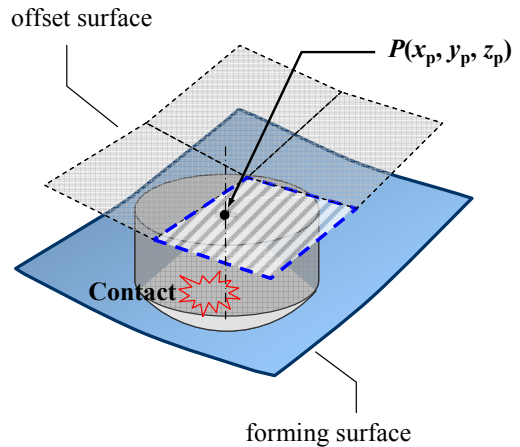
A patch that center of a punch is aligned under contacting with forming surface
